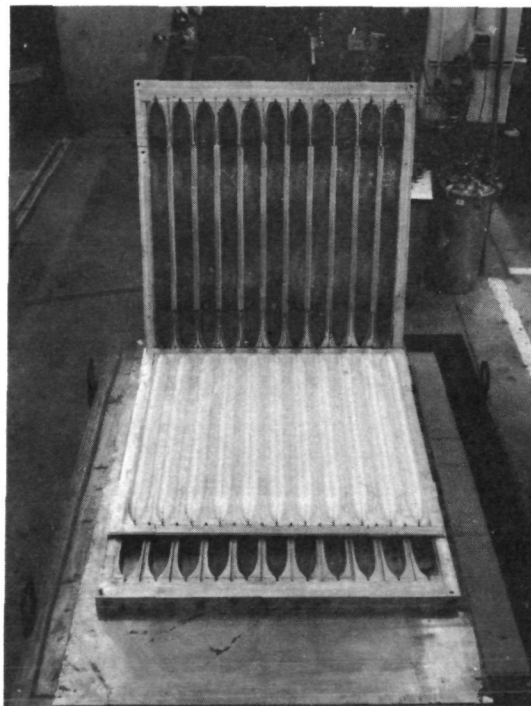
CIRCULAR TUBE PANEL WITH BONDING FIXTURE
